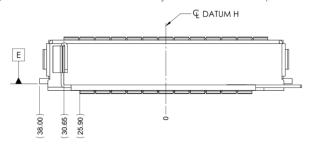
SFF OCP NIC 3.0 Card with Ejector CTF Dimensions (Side View)
